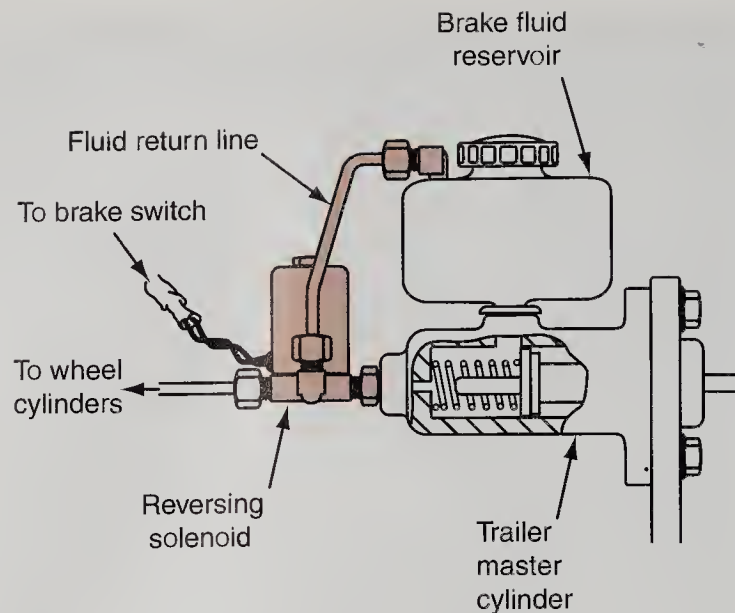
The reversing solenoid is needed with the standard brakes in Figure 1-15 to prevent braking in reverse. (Courtesy of Champion Trailer Parts Supply)
